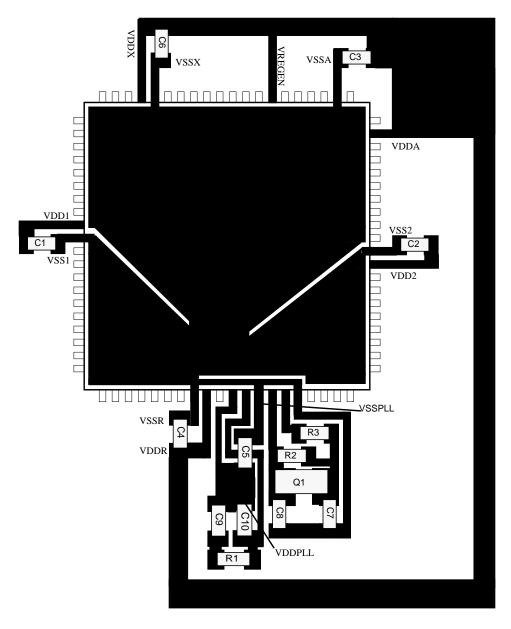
Recommended PCB Layout for 80QFP Pierce Oscillator
